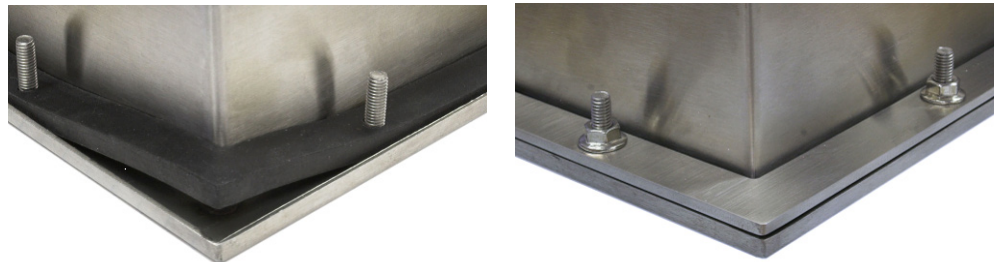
Gasket on Enclosure (left) and Backing Plate Installed (right)
